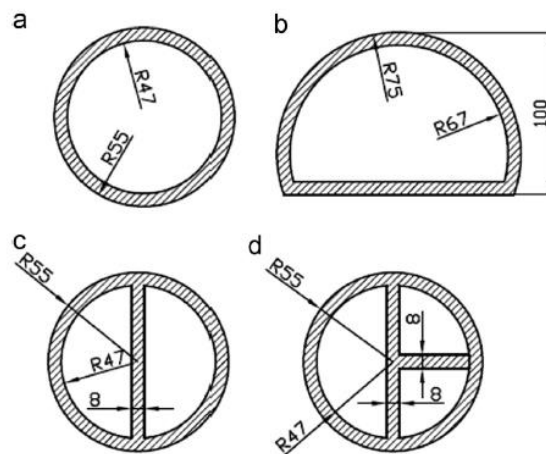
Cross-sectional view of the four used composite tubes (mm) [66]
